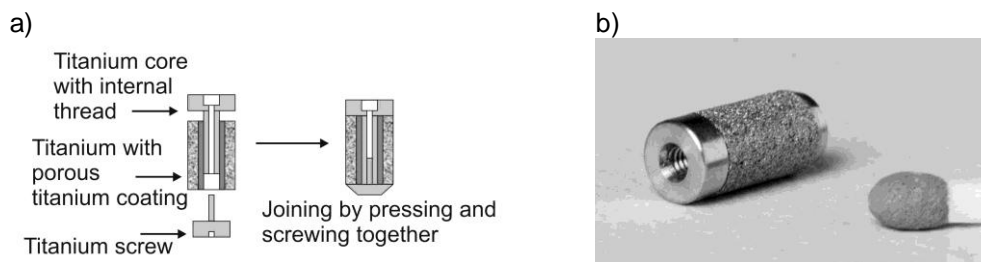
a) Schematic processing of the dental implant with a porous coating, b) dental implant with porous coating.
